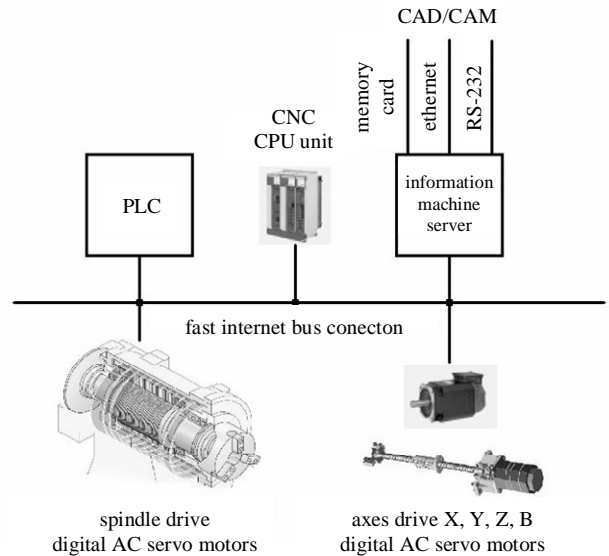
Working principle of modern machine tool with CNC control with CPU technology
